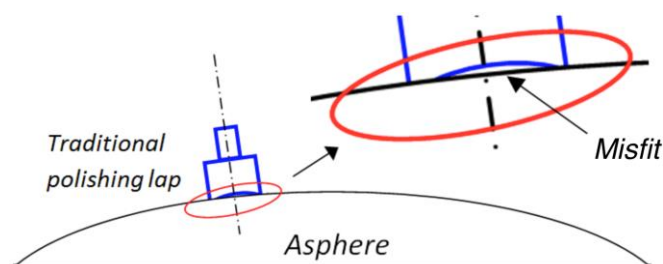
Tool-shape misfit between a rigid polishing tool and an aspherical component (Li, 2012).
